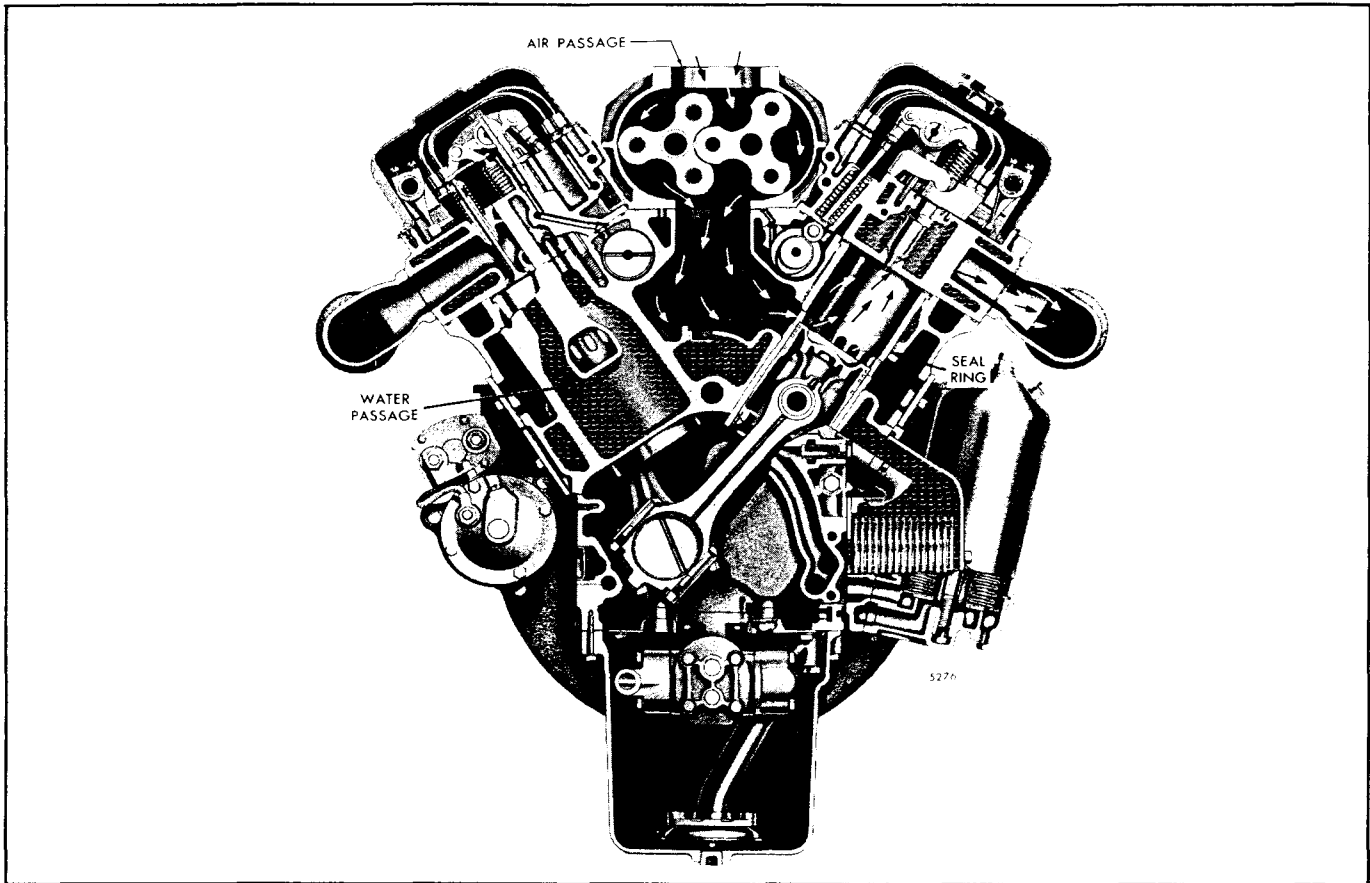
Air and Water Passages in 8V Cylinder Block
